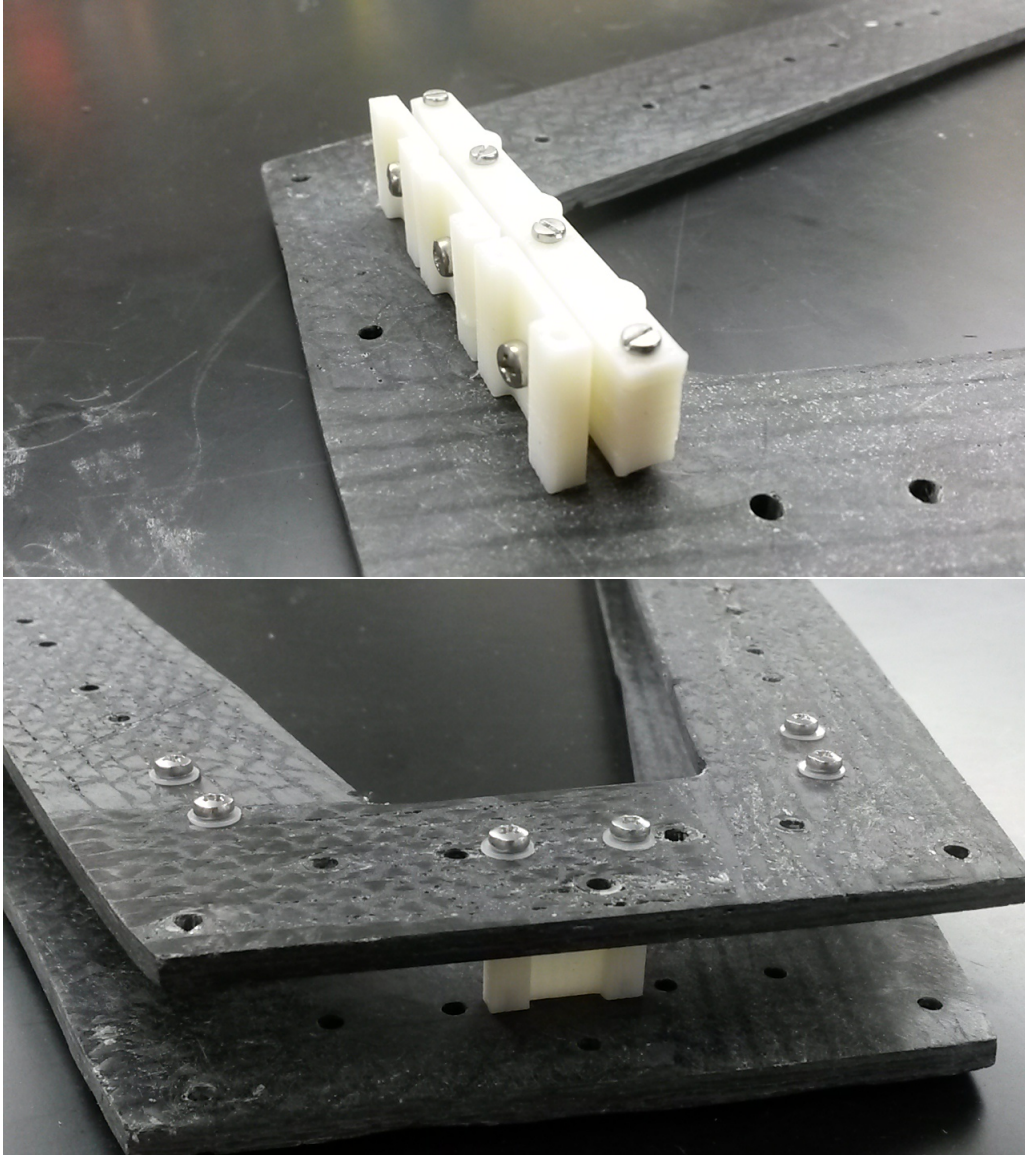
Top: view of proper orientation of pull-out parts on small end with inner frame assembly attached to pull-outs via M2.5 screws; Bottom: support frames attached with various pull-outs, plastic washers on M2.5 screws
